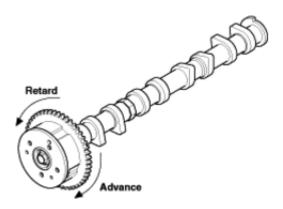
Turning CVVT Assembly To Advance Angle Side Courtesy of HYUNDAI MOTOR CO.
